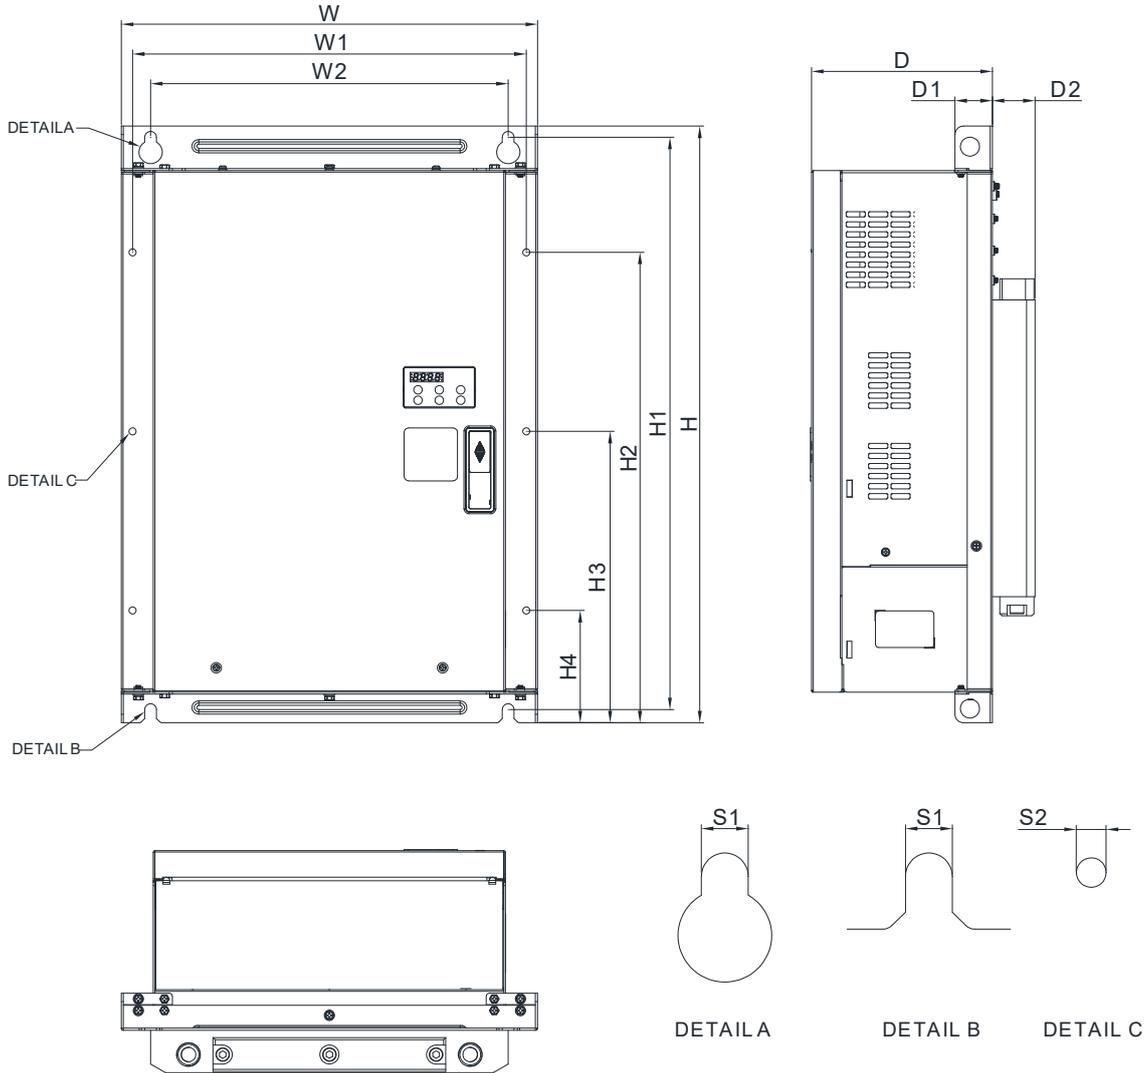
DETAIL A (MOUNTING HOLE) DETAIL B (MOUNTING HOLE)
